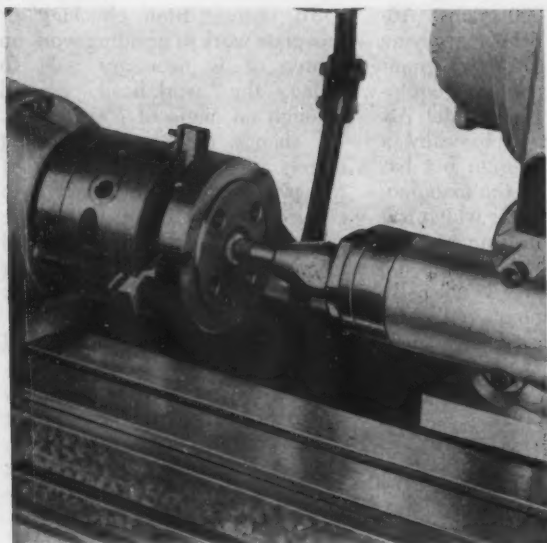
Internal grinding setup on machine shown in Fig. 1
